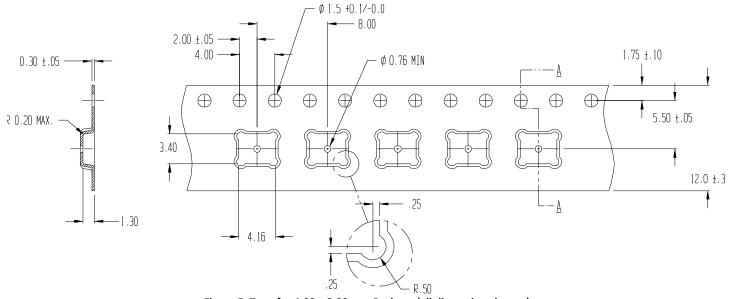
Tape for 4.00 × 3.00 mm Package (all dimensions in mm)
